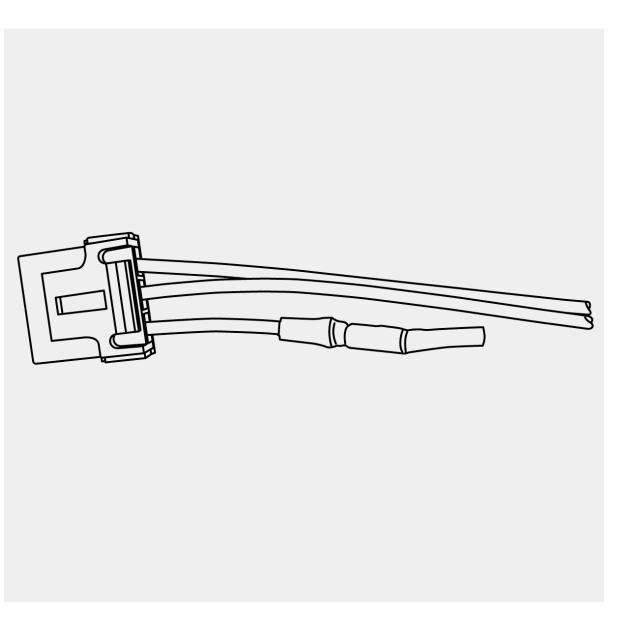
Heat To Crimped Area Of Barrel Courtesy of GENERAL MOTORS COMPANY
